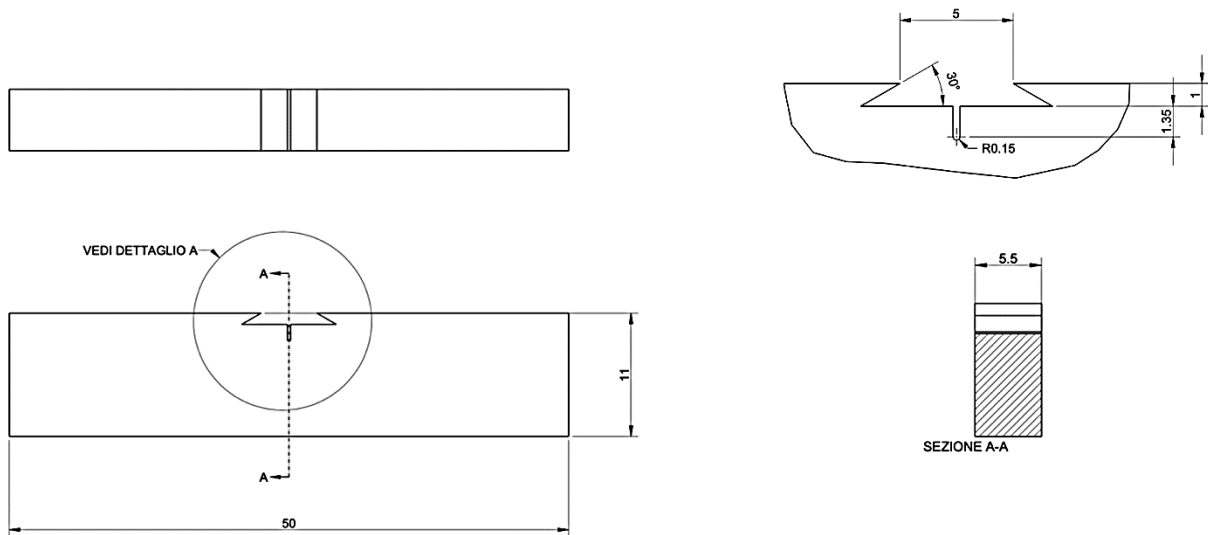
AISI 316L specimen geometry (dimensions in mm).
